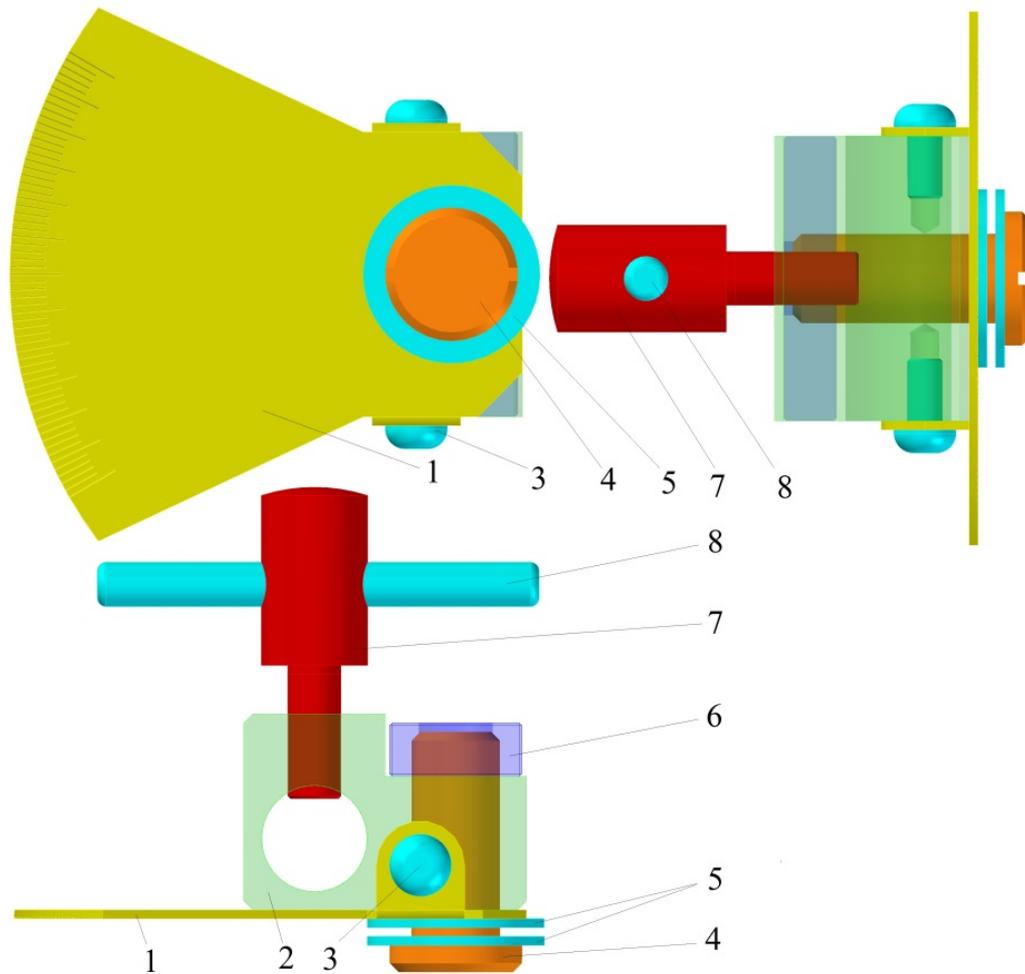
3D model of the device for measuring lathe tool constructive angles
